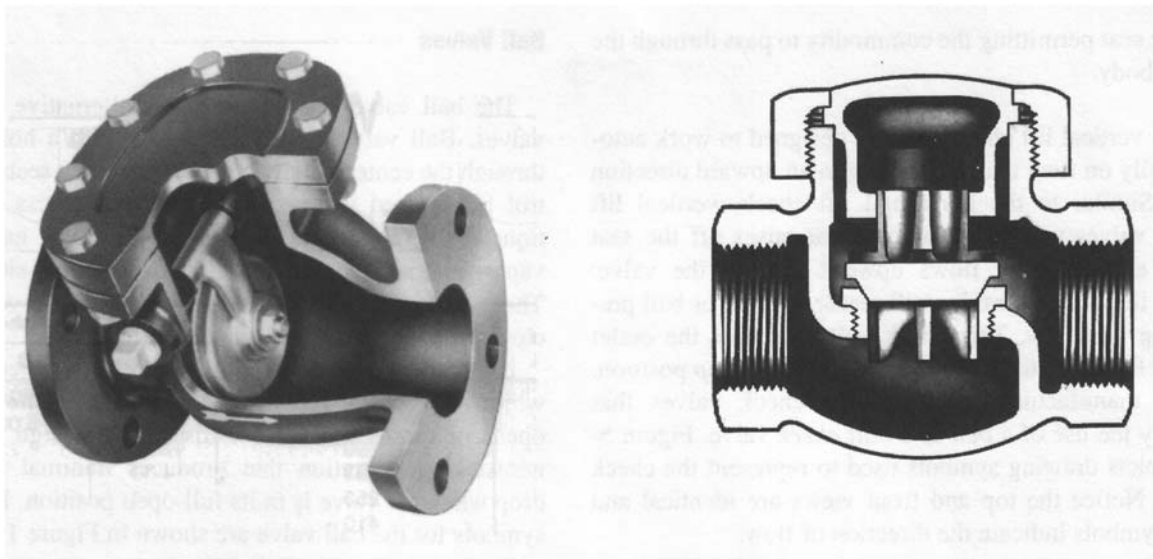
Swing and lift check valves. Courtesy of Crane Co.
